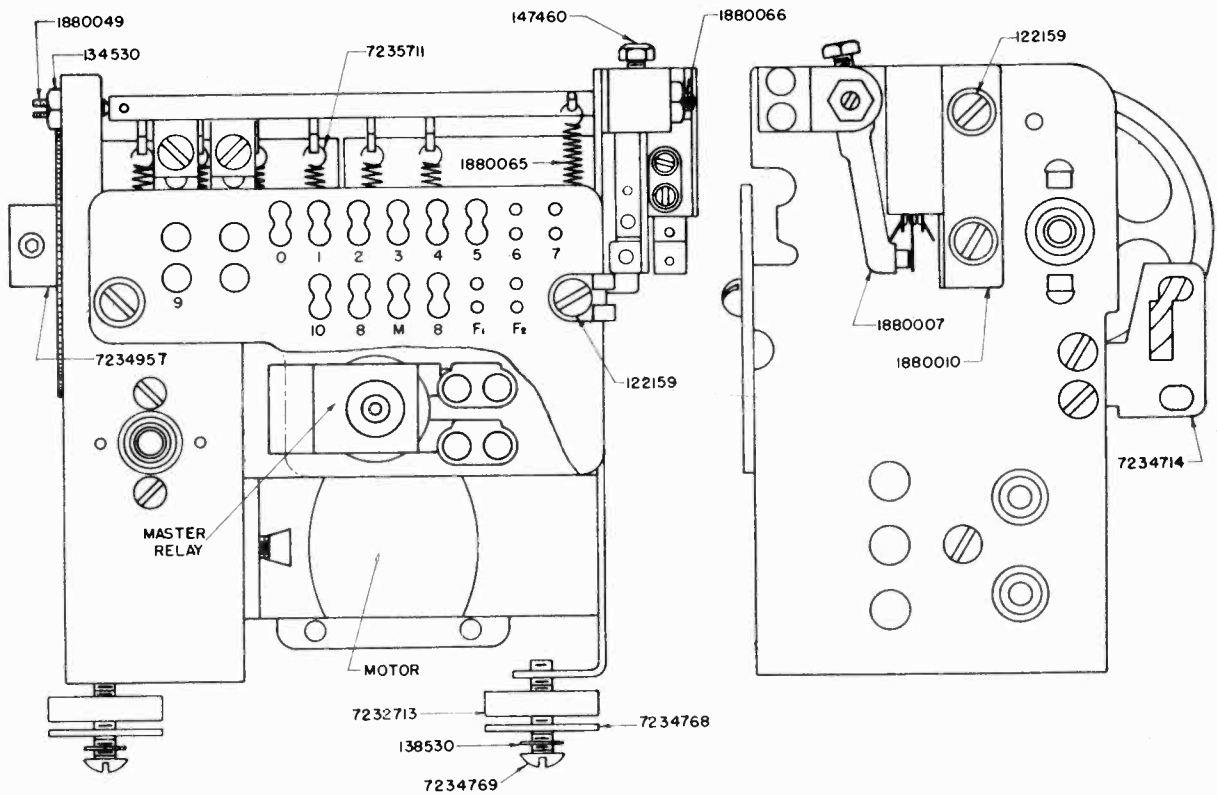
PARTS LAYOUT--DELCO-MATIC TUNER
